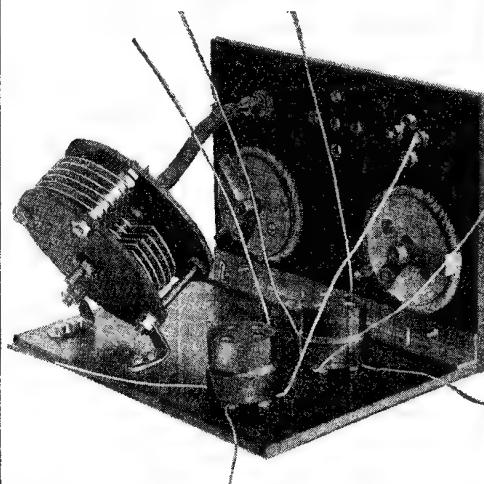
(above). Short wires will be seen attached to each valve leg. These are attached before assembly to the base. Note the position of the valves. Fig. 8 (right). How the condenser is fixed behind the H. F. and detector panel is shown. On the right will be seen the valve holder in which the high-frequency transformer is plugged
